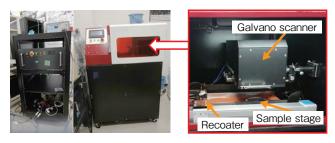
External appearance photograph of a SLM method 3D printer equipped with a blue diode laser.
